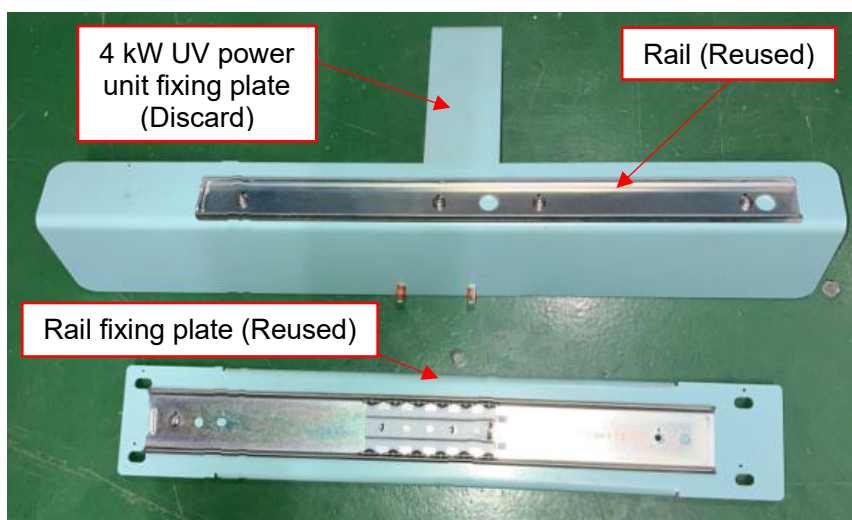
Removal of rail of 4 kW UV power unit fixing plate
